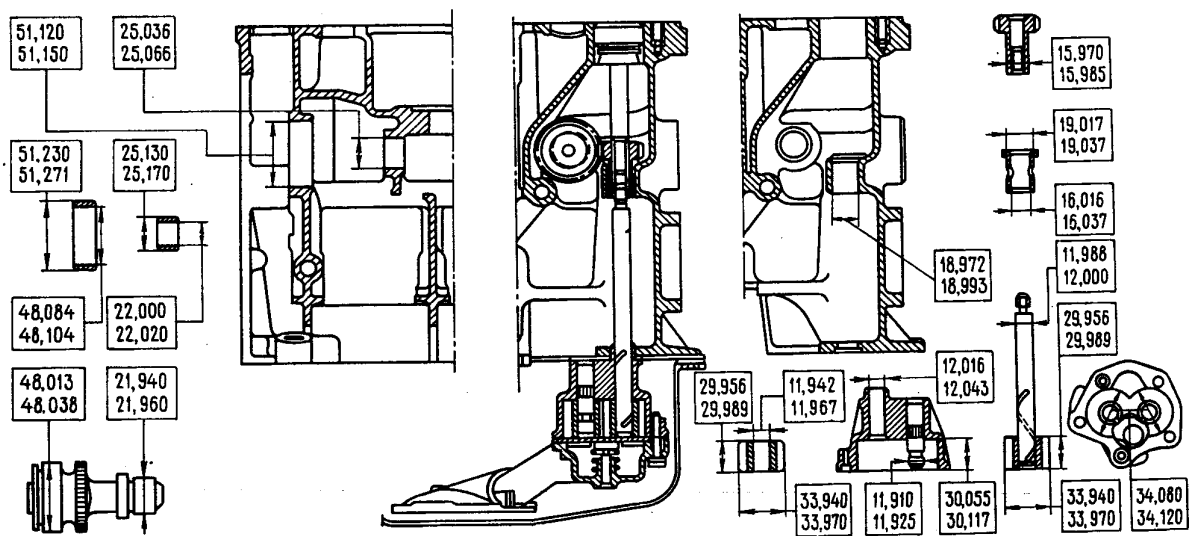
Basic Dimensions of Oil Pump and Drive
